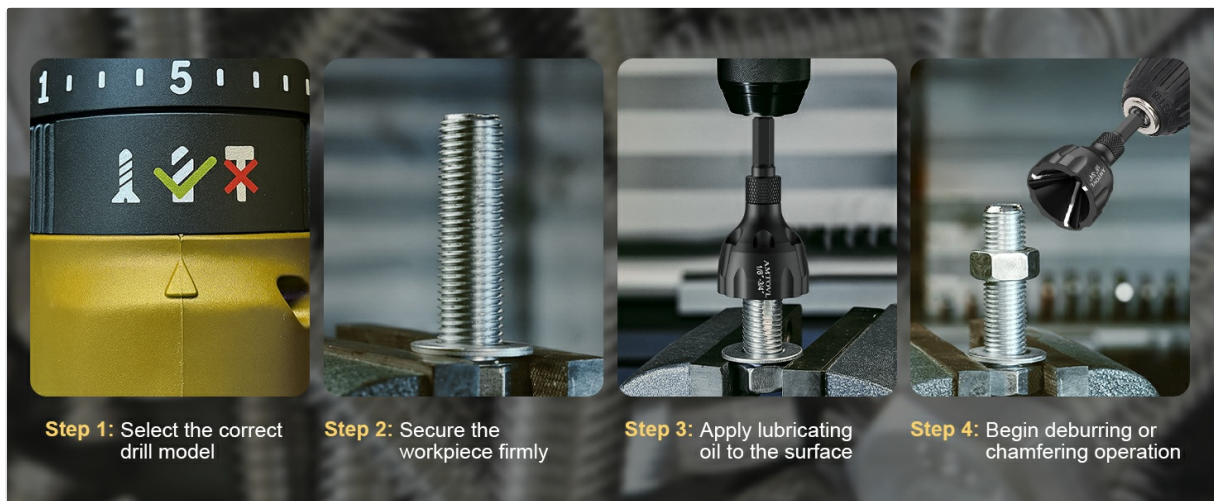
A four-step visual guide illustrating the process: 1) Select drill mode, 2) Secure workpiece, 3) Apply lubricating oil, 4) Begin deburring/chamfering.
